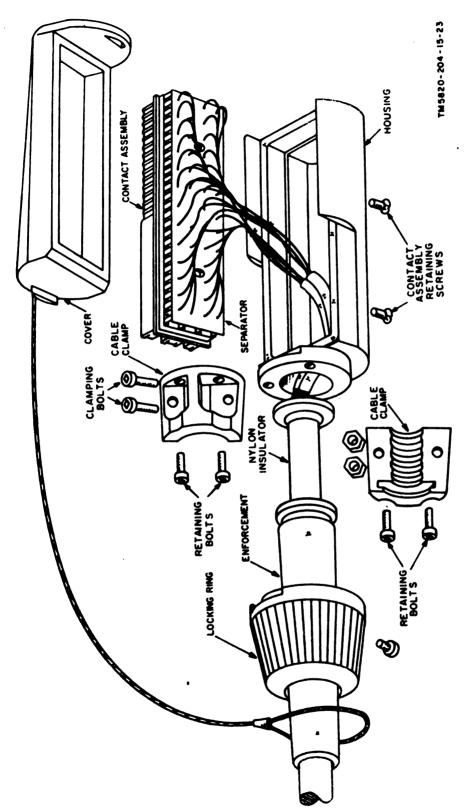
Connector, Plug, Blectrical U-185B/G, exploded view.
